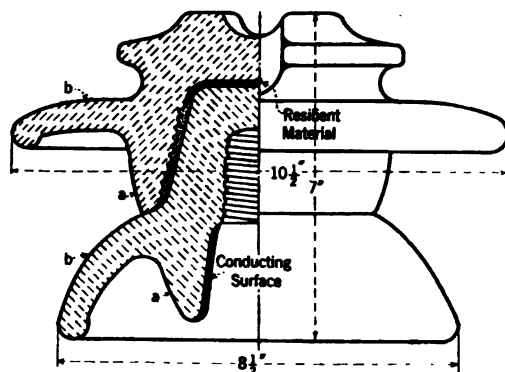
B—TWO-PIECE INSULATOR OF THE PROPOSED TYPE OF DESIGN
